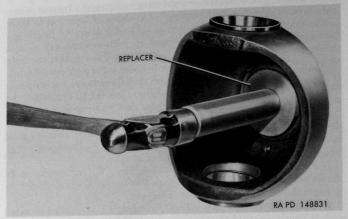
Installing shaft oil seal assembly using replacer 41-R-2392-640.
